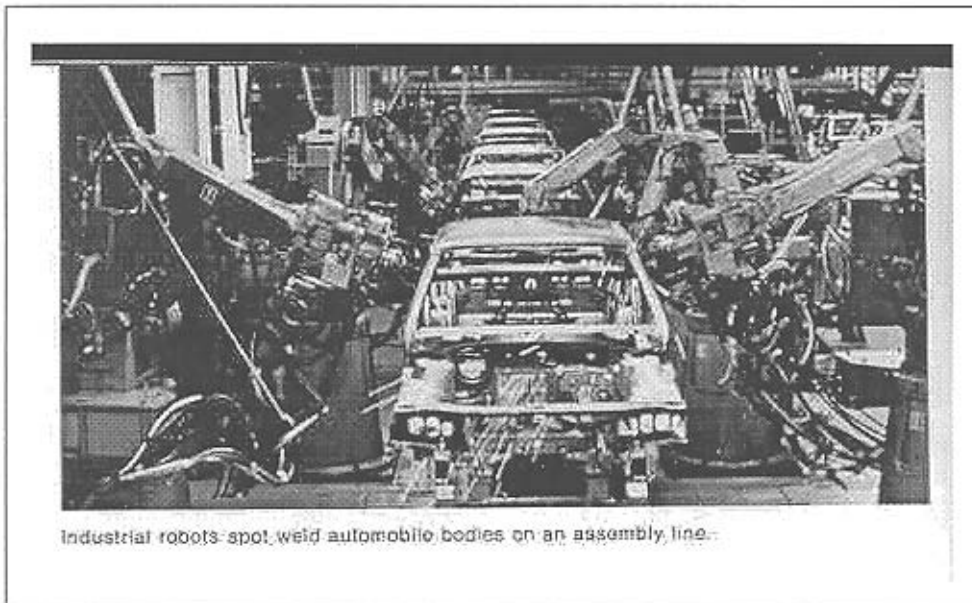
Industrial robots spot weld in automobile assembly line (source : Toyota Industry plant, Japan)
